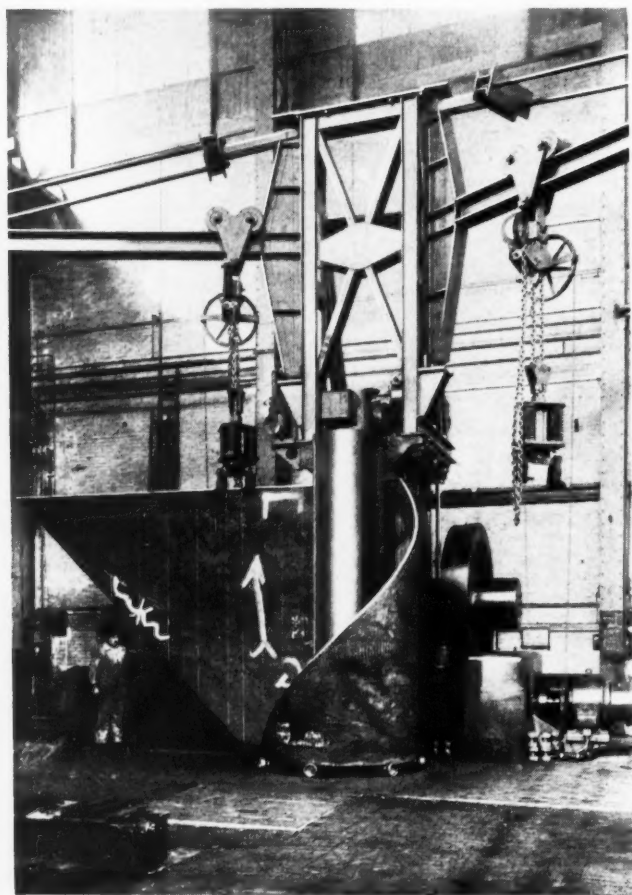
shows a gear-hobbing machine of unusual size designed for cutting spur, helical, herringbone, and worm gears up to 23 feet in diameter. Fig. 5 shows a horizontal boring and milling machine having a boring spindle 12 inches in diameter, within which is mounted a central high-speed spindle. The total height of this machine is over 30 feet. Figs. 6 and 7 show two illustrations of a vertical plate-bending press for bending plates up to 20 feet in width and up to a thickness of 2 1/2 inches. This
